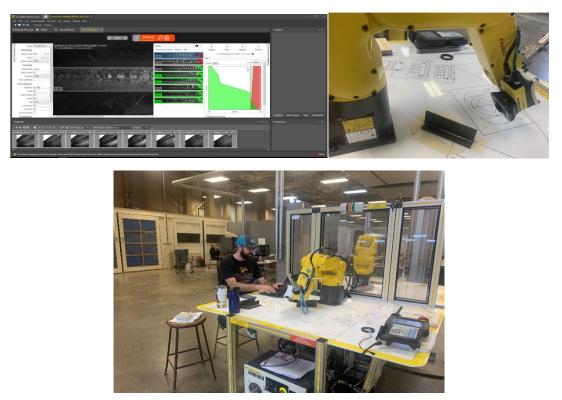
left: A deep learning software recognizing defects in weldments. Right: A Cognex machine vision system attached to a Fanuc robot, gathering data on weldment samples
